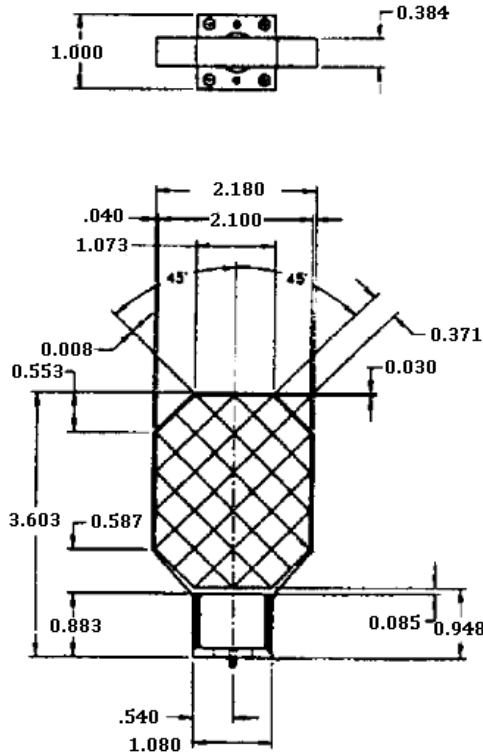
Technical drawing of G12 (Dimensions are in inches)
